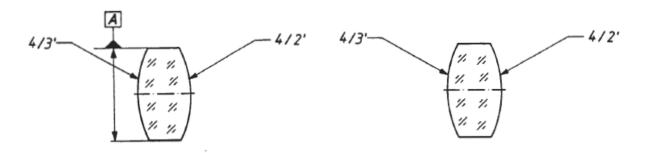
Centring tolerances example, ISO 10110-7
